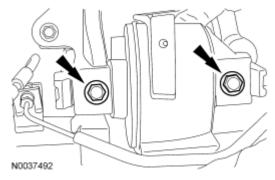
Locating Starter Wire Nuts Courtesy of FORD MOTOR CO.
